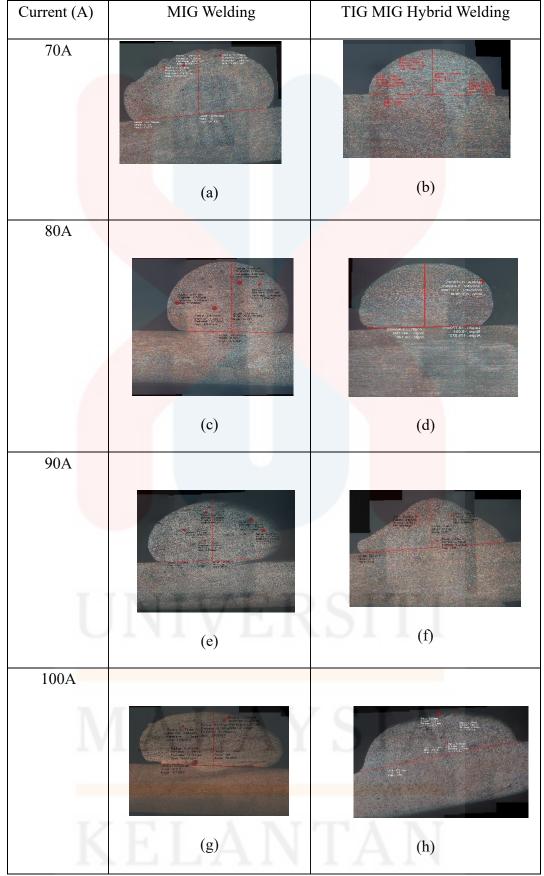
Measure Cross-section of Porosity Formation in Welded Aluminium 5083
